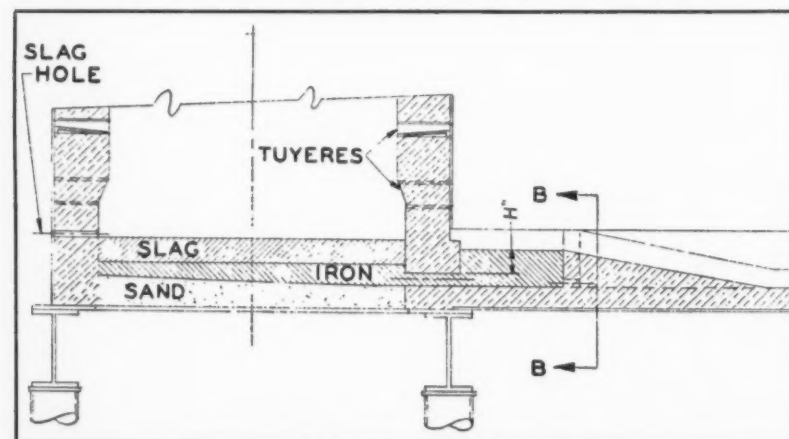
Rear slagging hole is located higher than metal tap hole.
